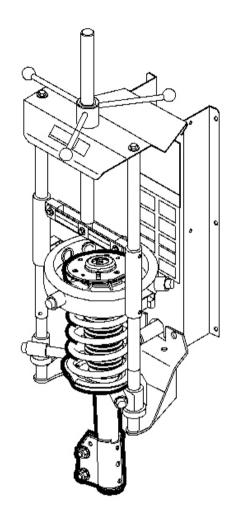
Strut Assembly & J 45400 Courtesy of GENERAL MOTORS CORP.
